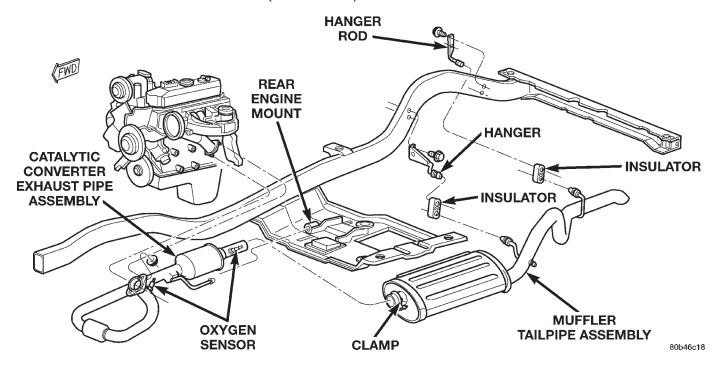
Exhaust Pipe Removal—2.5L/4.0L
